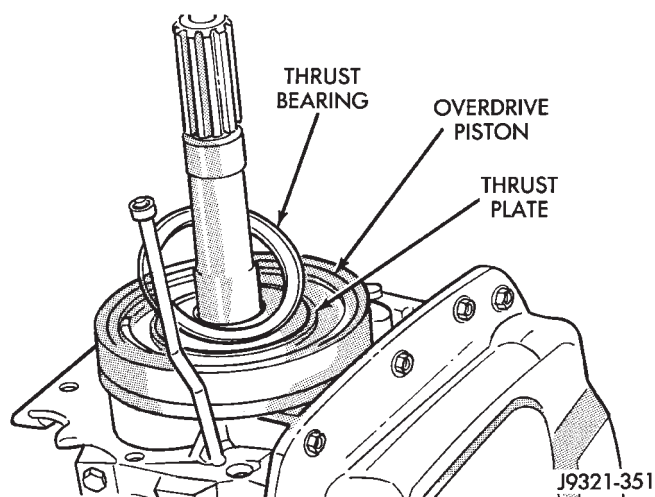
Overdrive Piston Thrust Bearing Removal/Installation
